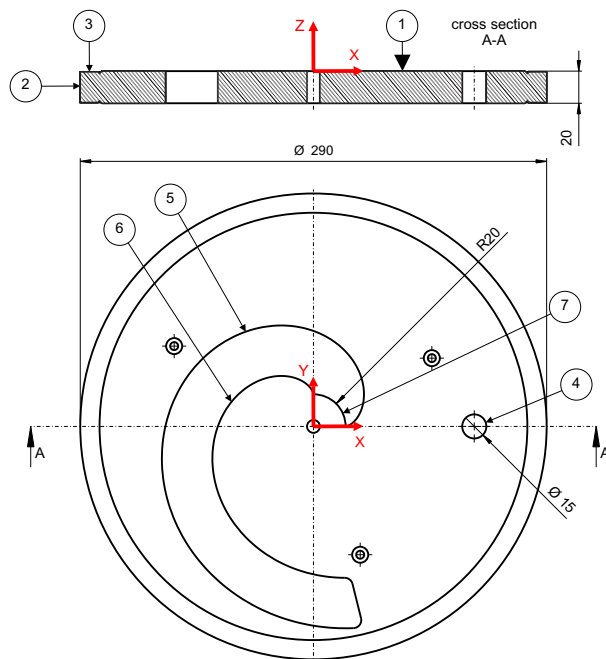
Technical drawing of the involute waviness scanning measurement standard.
